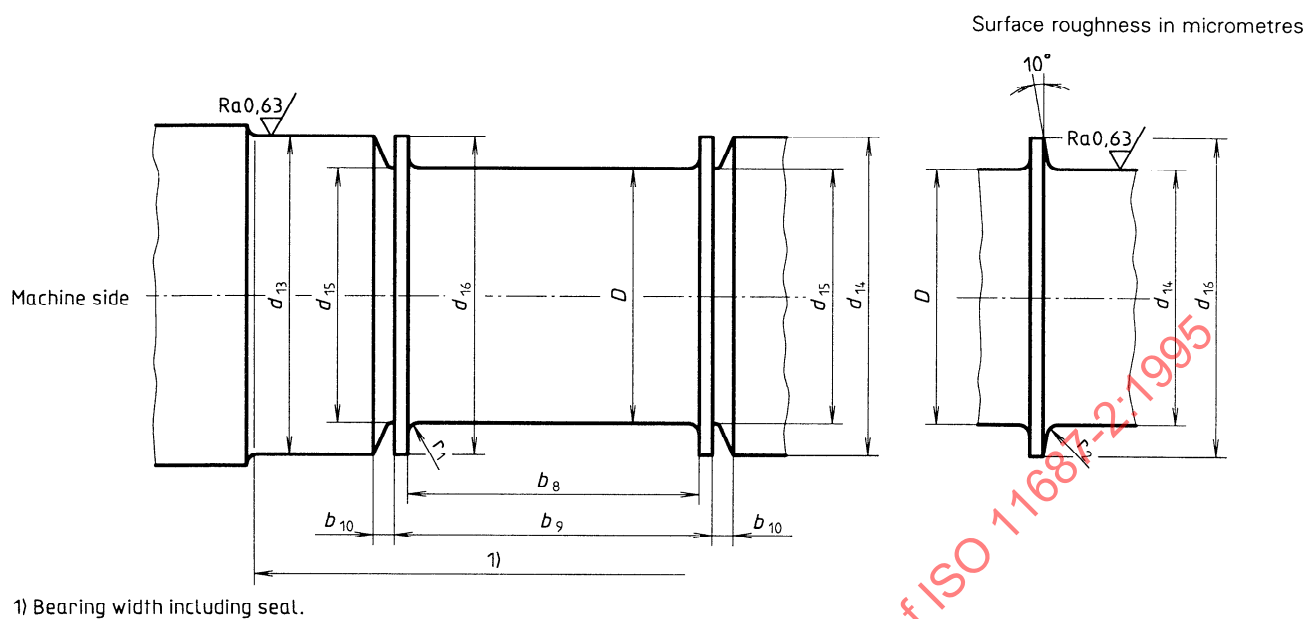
Shaft design for non-locating (free) bearing (thrust bearing part Q)
